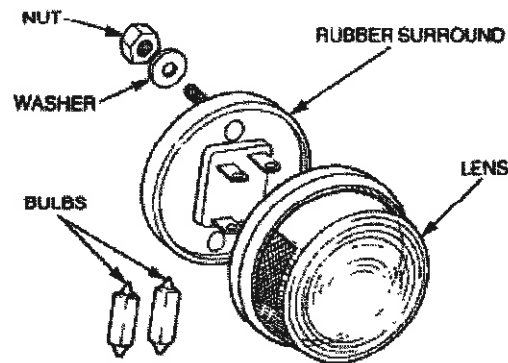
Stop/Tail and Number Plate Light - Exploded View
